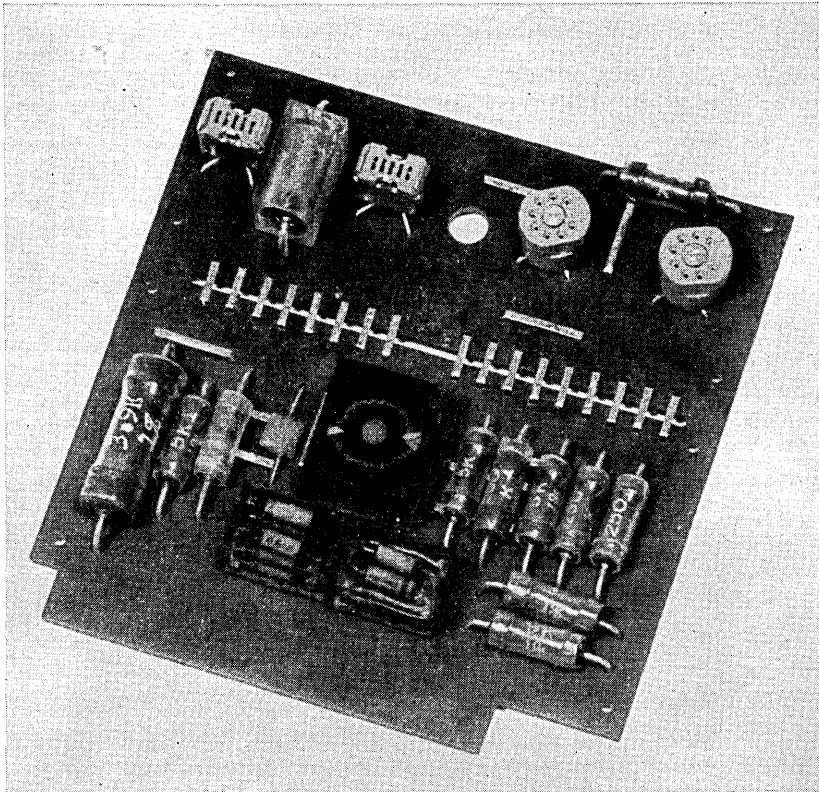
Miniaturized airborne assembly showing types of components handled; the circuit board is laid out flat to facilitate installation of components by the attaching machine
